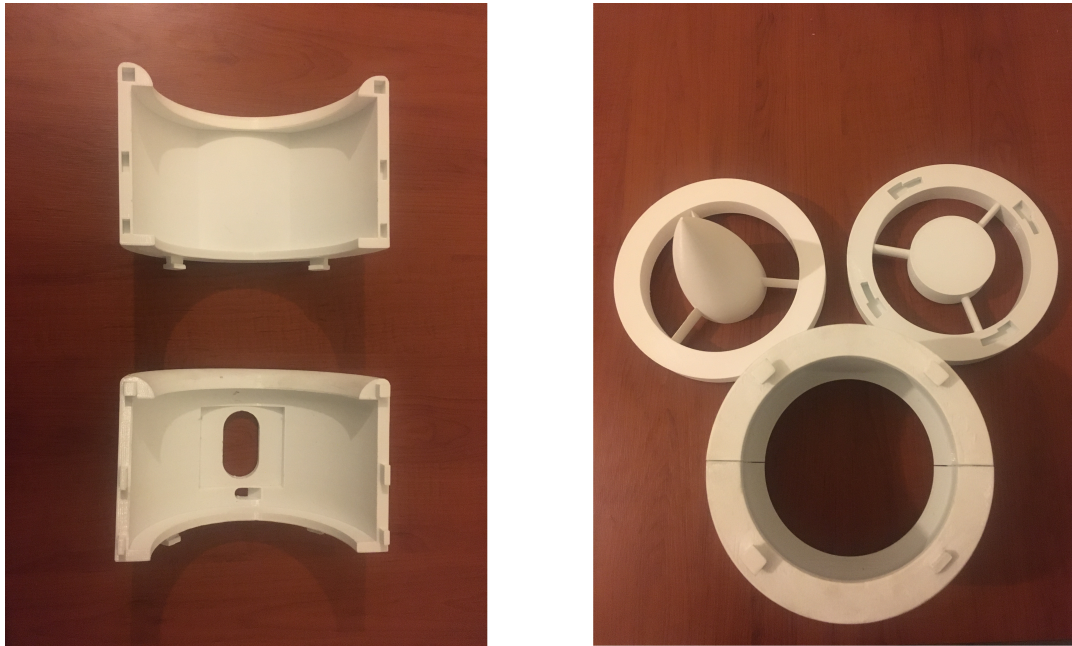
Casing in a disassembled form (left) and the casing with add-on pieces (right)
